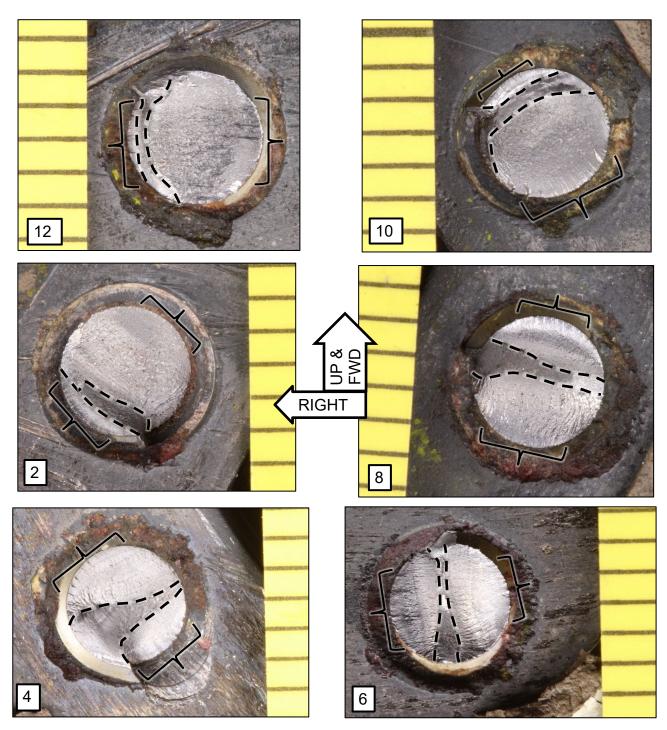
Close views of the 90° gearbox attachment stud fracture surfaces. Dashed lines indicate progressive crack growth boundaries, and brackets indicate crack origins.
